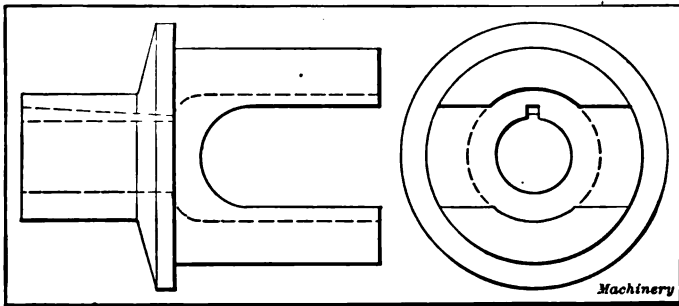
Universal Joint Yoke in which Tapered Keyway is to be Broached
